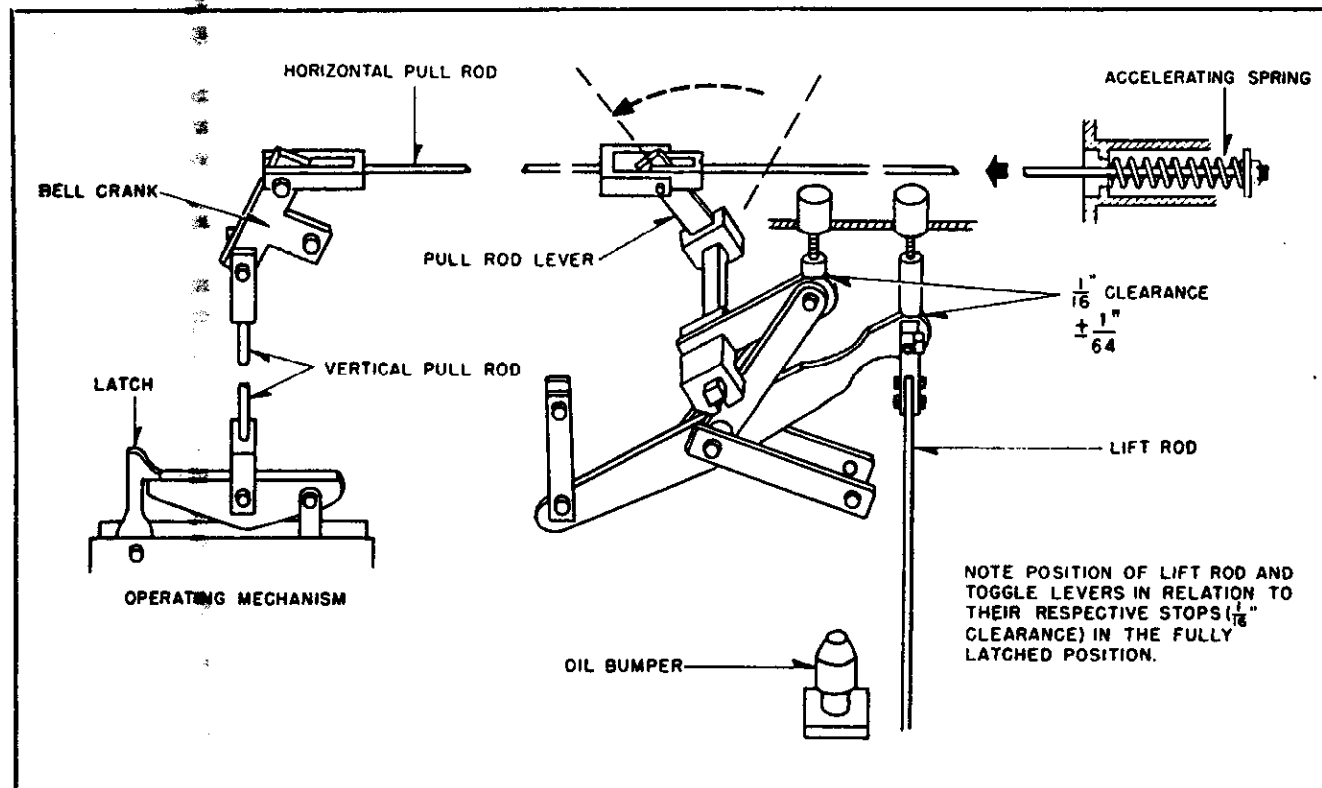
Opening Stroke of Pole Unit Lever Mechanism
